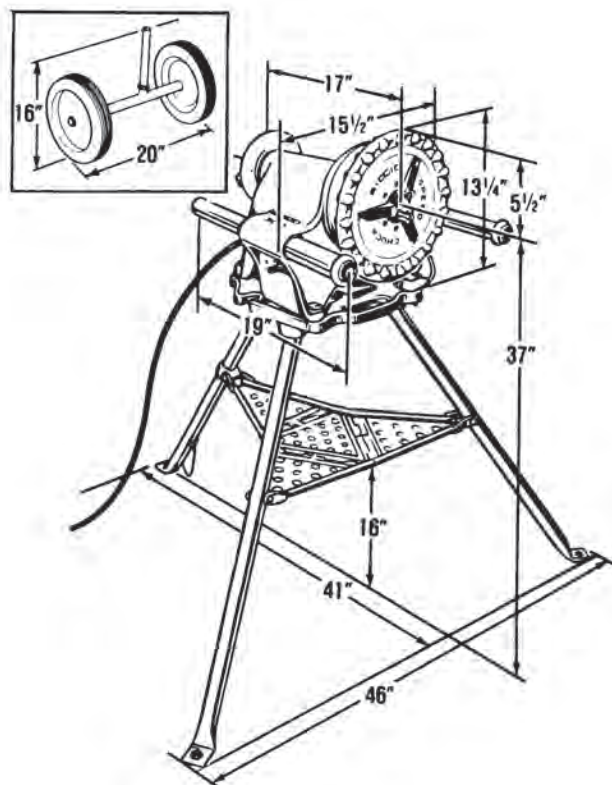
300 Power Drive and 1206 Stand Approximate Dimensions
